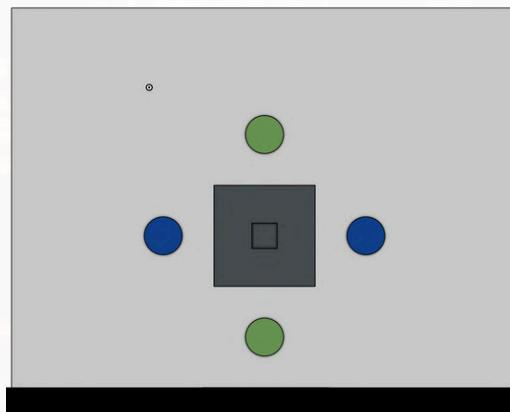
Particle Laser Front View (For dimensions refer to the provided Onshape assembly)
